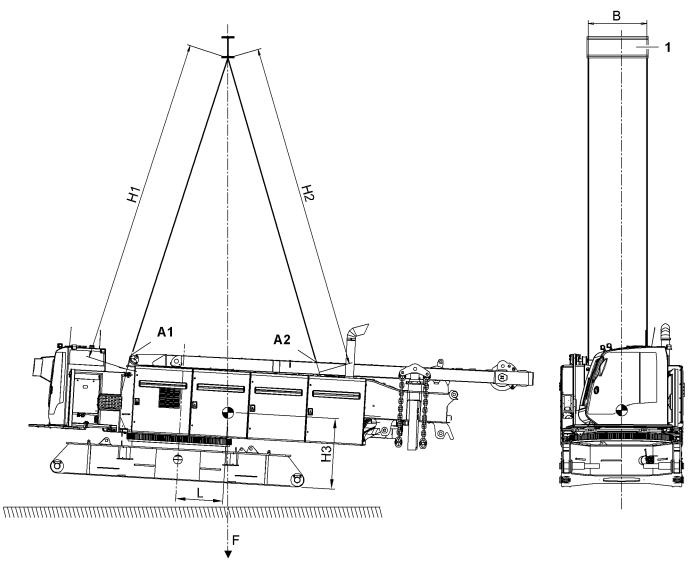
Loading the basic machine without crawler side frame, carbody counterweight and rear counterweight - overview
